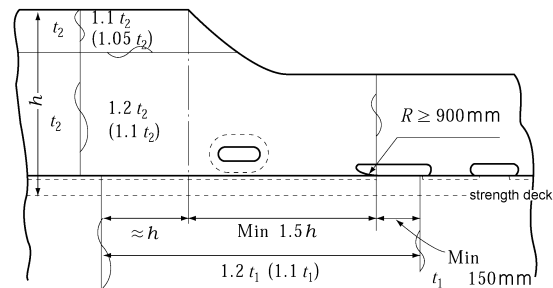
Construction of end part of superstructure (with expansion joints)
